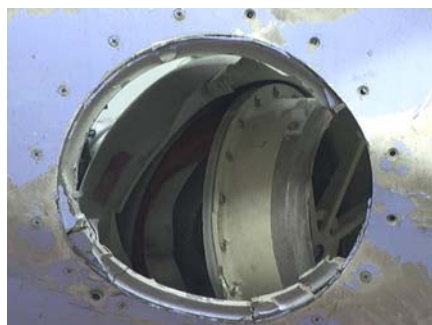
Upper Pressure Relief Valve, close-up showing markings.
